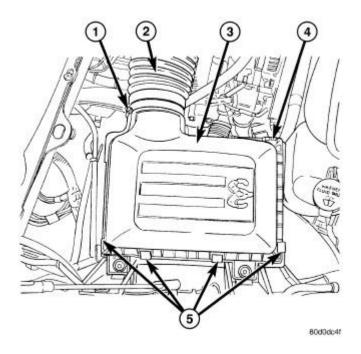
AIR CLEANER HOUSING COVER Courtesy of CHRYSLER LLC
